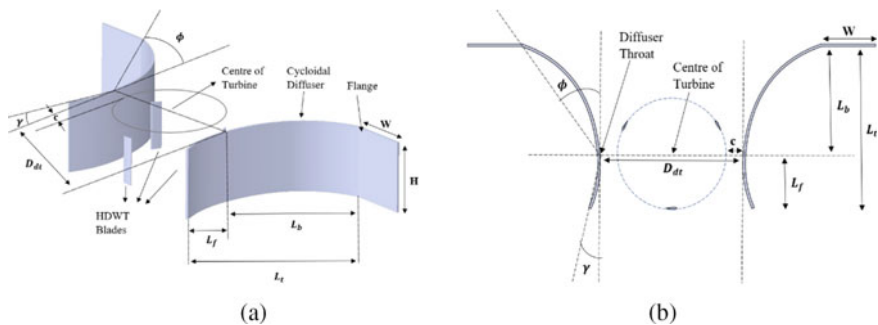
Cycloidal diffuser design parameters and arrangement with HDWT; a Three-dimensional view, b two-dimensional view
